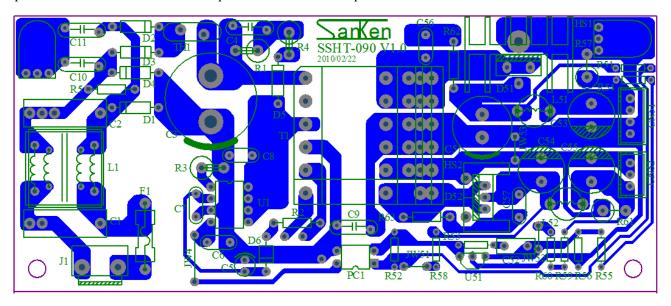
PCB circuit trace layout example (DIP8 type)
